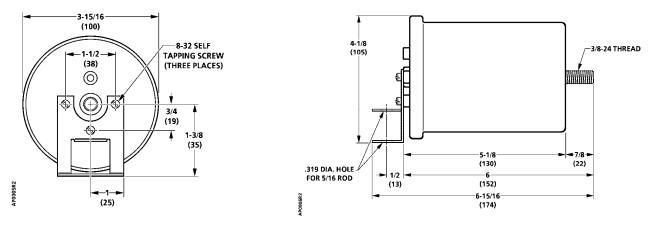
No. 3 Actuator with Pivot Mounting Bracket Dimensions. Dimensions are in Inches (Millimeters).
